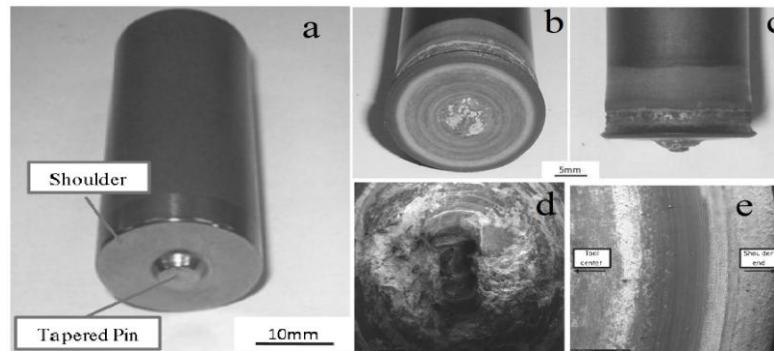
a) Tool design showing the pin and shoulder features, b) Front view of the worn tool after the FSW process, c) side view of the worn tool, d) Micrograph of tool pin showing a fractured region, e) Micrograph of tool shoulder showing^[15]
